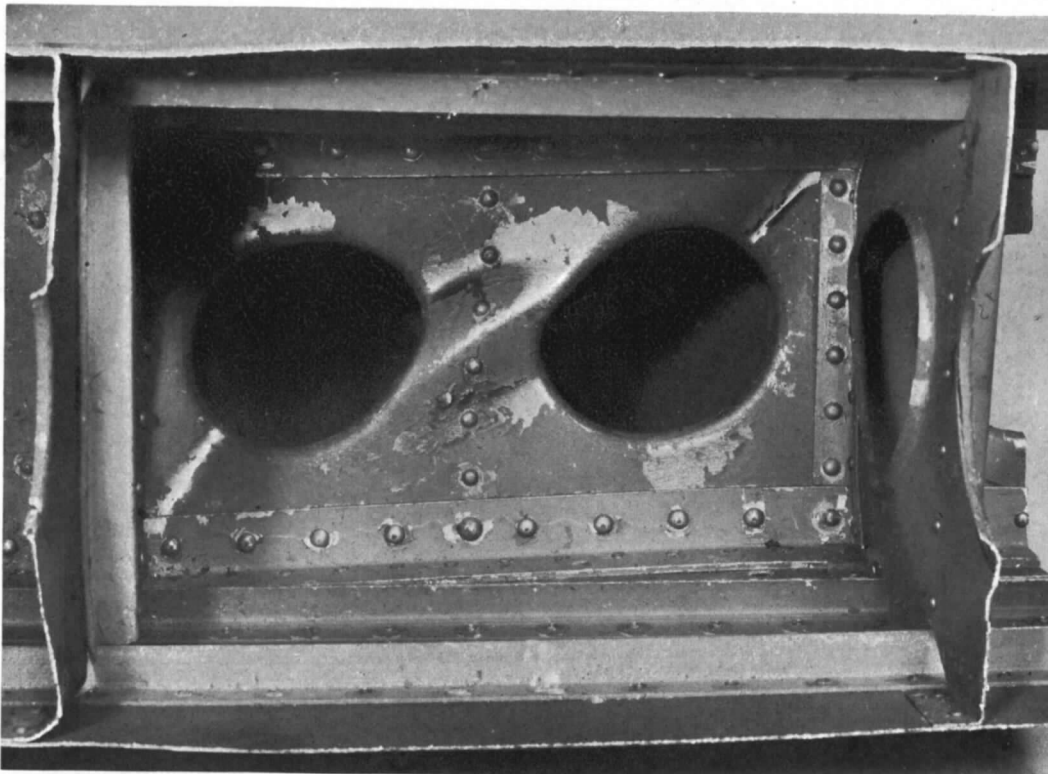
Typical failure of metal tailplane (*Typhoon*).
